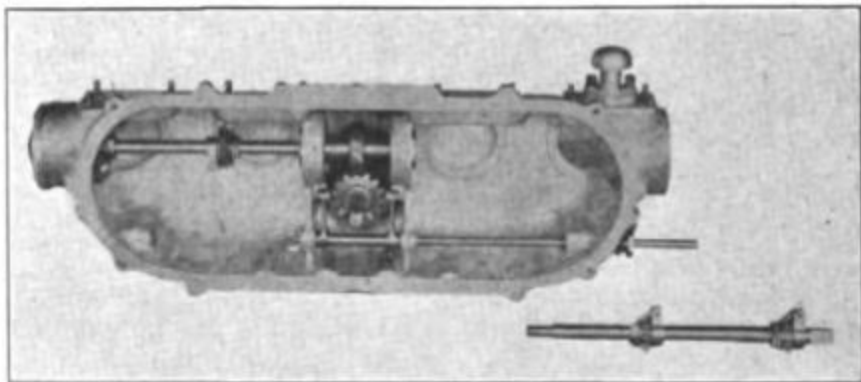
INTERIOR VIEW OF MAGNETO HOUSING
